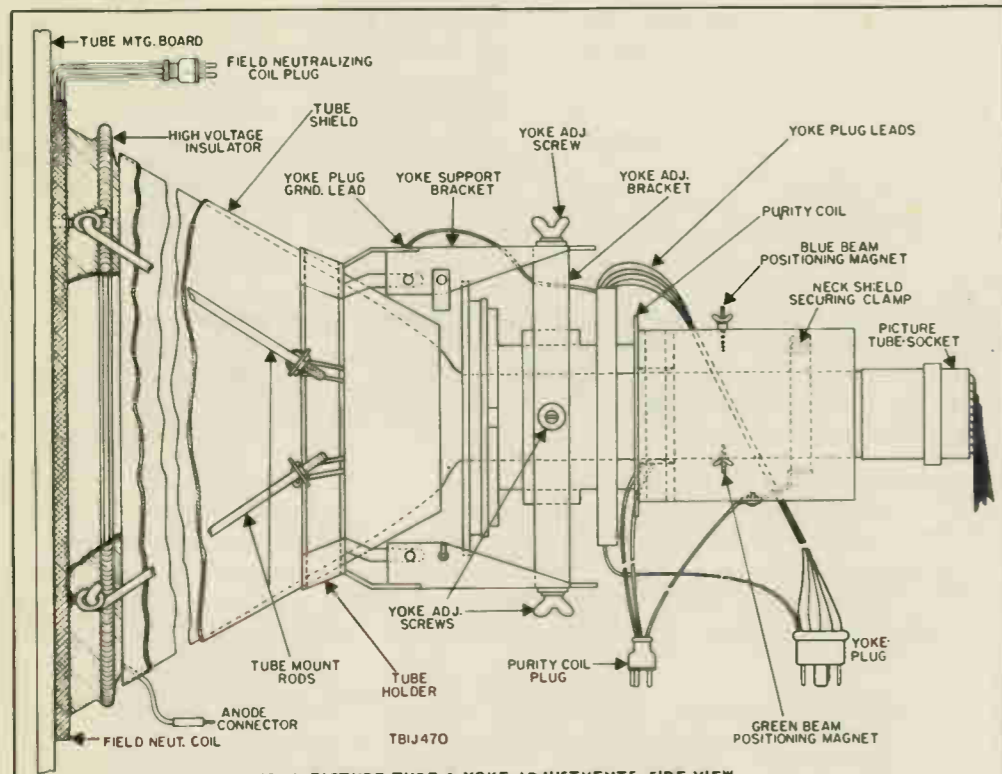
PICTURE TUBE & YOKE ADJUSTMENTS, SIDE VIEW
